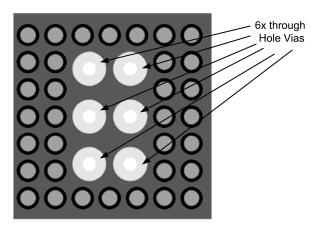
Possible PCB Layout Configuration to Use 6X Through Hole Vias in the Middle
